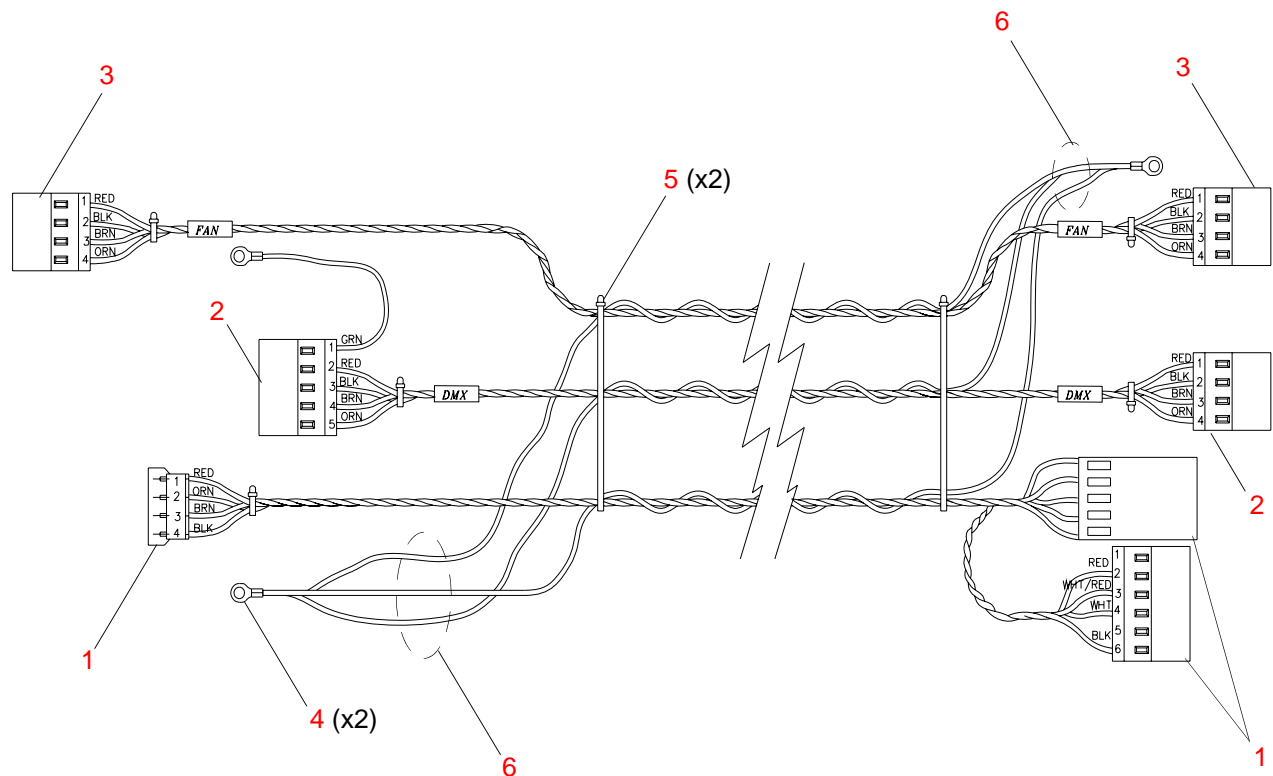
VL500 80V LVS Fan Cable Assembly
